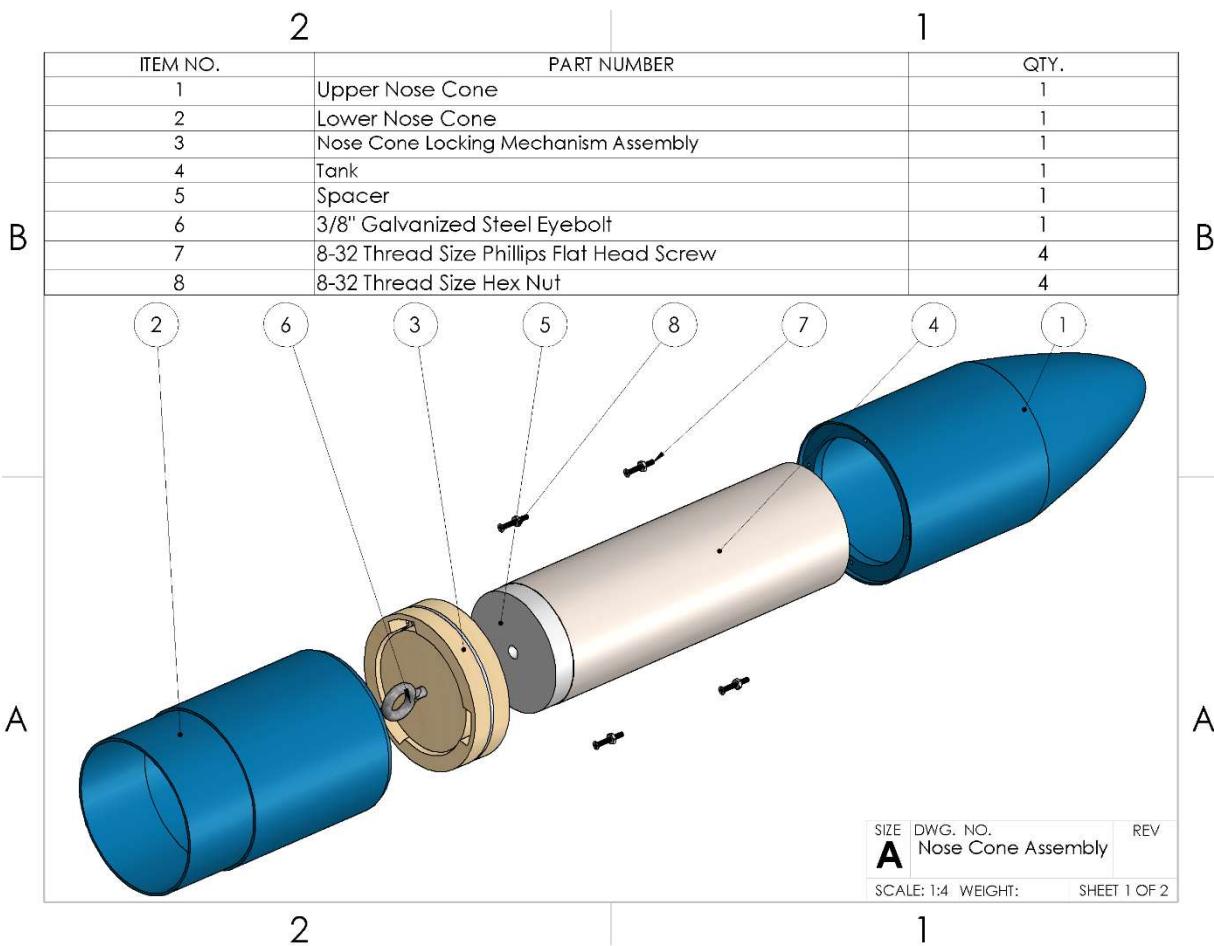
Exploded View of Nose Cone Assembly with Payload Fuel Tank
